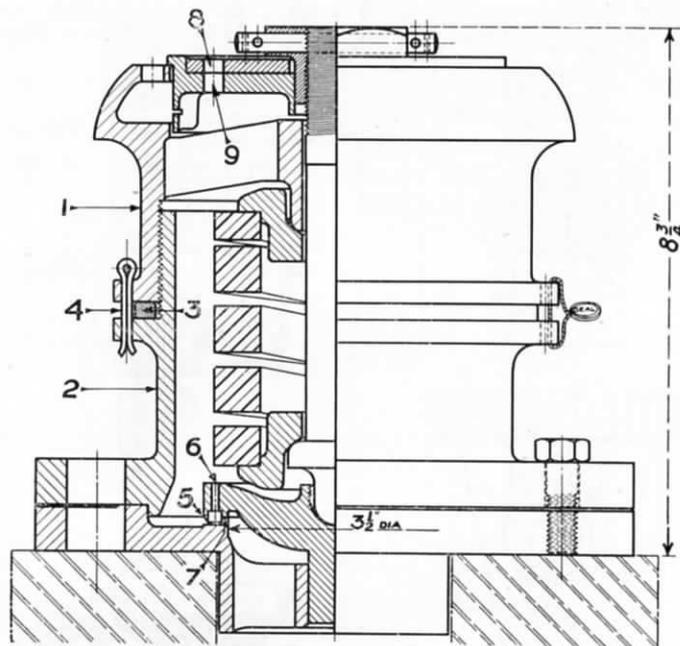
ROSS "POP" SAFETY VALVE FOR LOCOMOTIVE BOILERS.
